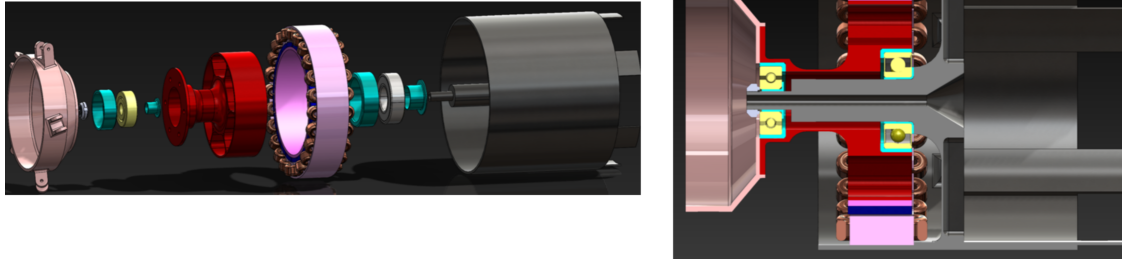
Left: HLM assembly broken out with primary pieces displayed, of primary concern is the heatsink (dark gray), and the rotor hub (red). Right: HLM installed inside the heatsink.
